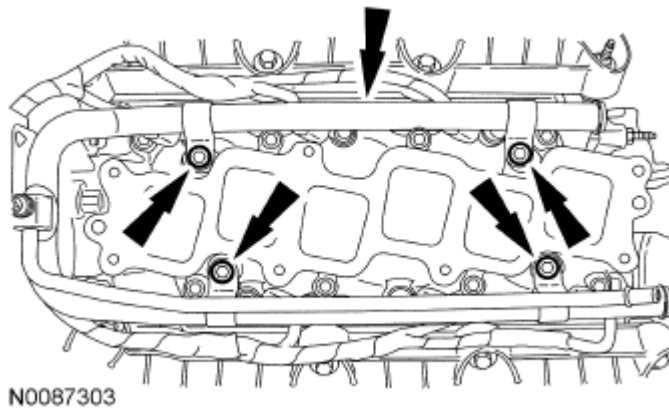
Locating Fuel Rail & Injectors Assembly Bolts
